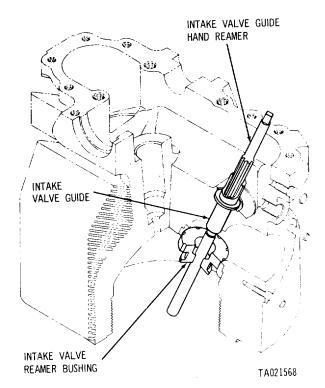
Intake value guided hand reamer and reamer bushing positioned in cylinder head - sectional view.
